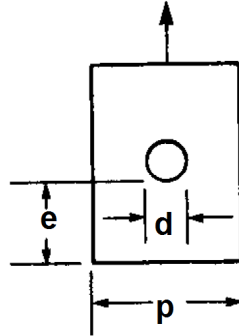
Simplified drawing of a bolted connection. Figure adapted from Chamis [1].
